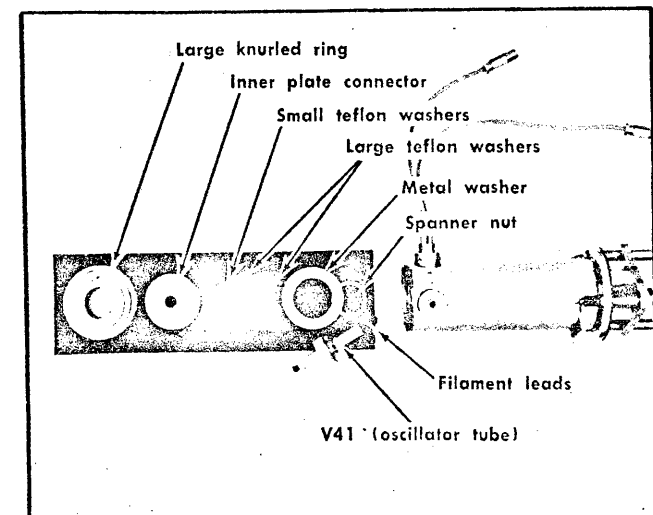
Oscillator disassembled to show the sequence as the components are removed or installed.
